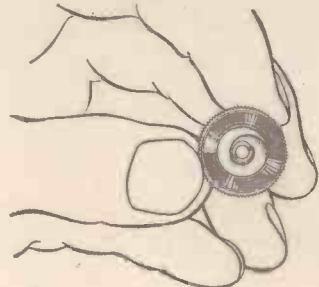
Use a mainspring winder to insert the spring in the barrel.
